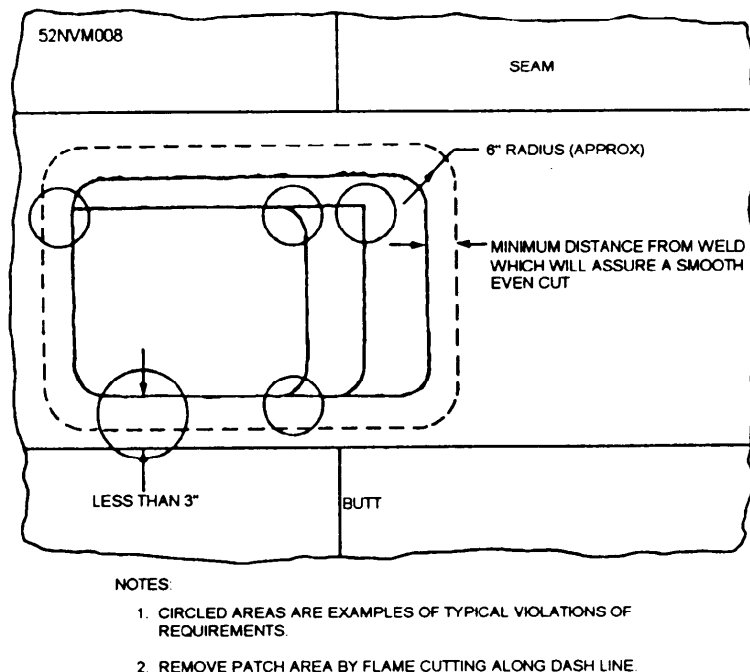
Patch removal involving more than two existing multiple cuts.
